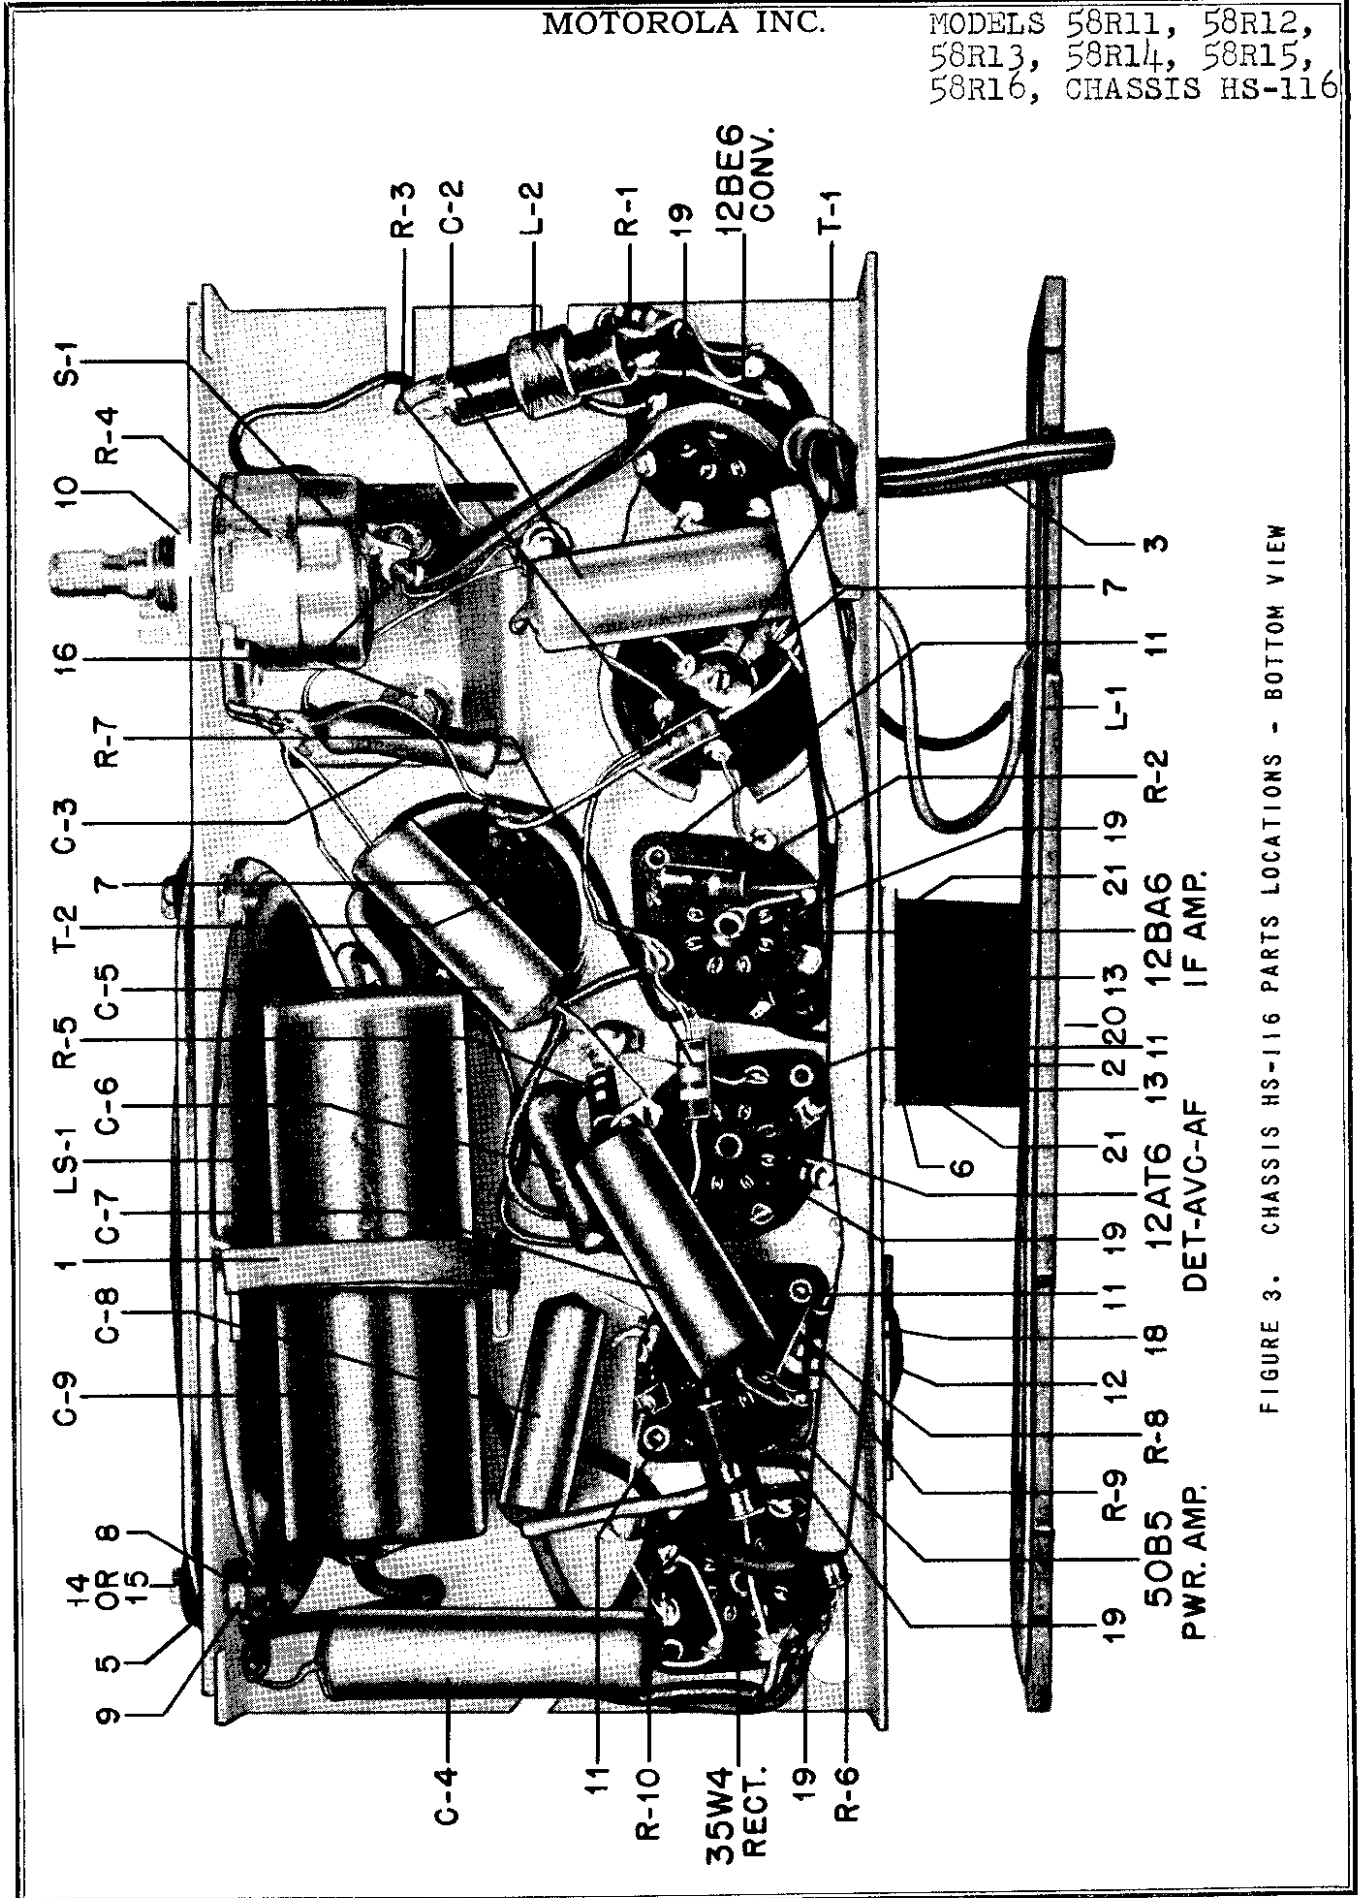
CHASSIS HS-116 PARTS LOCATIONS - BOTTOM VIEW
